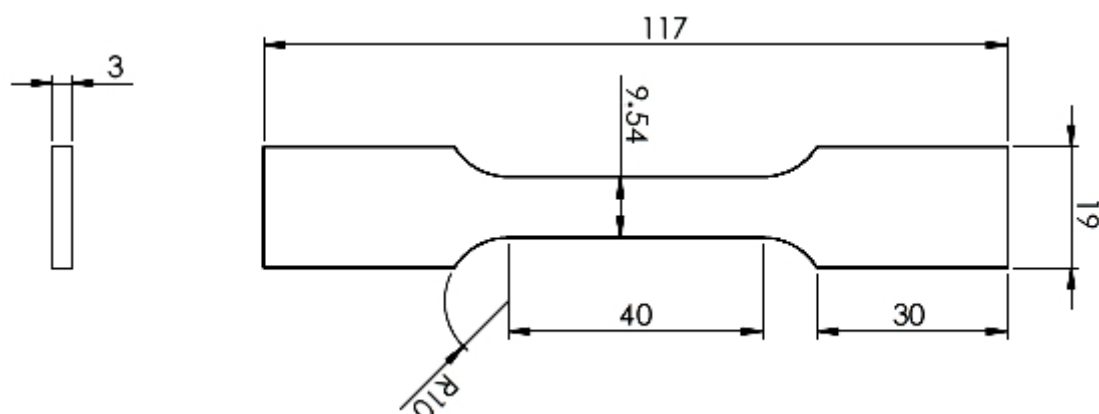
Geometry of tensile samples. Dimensions are given in mm.
